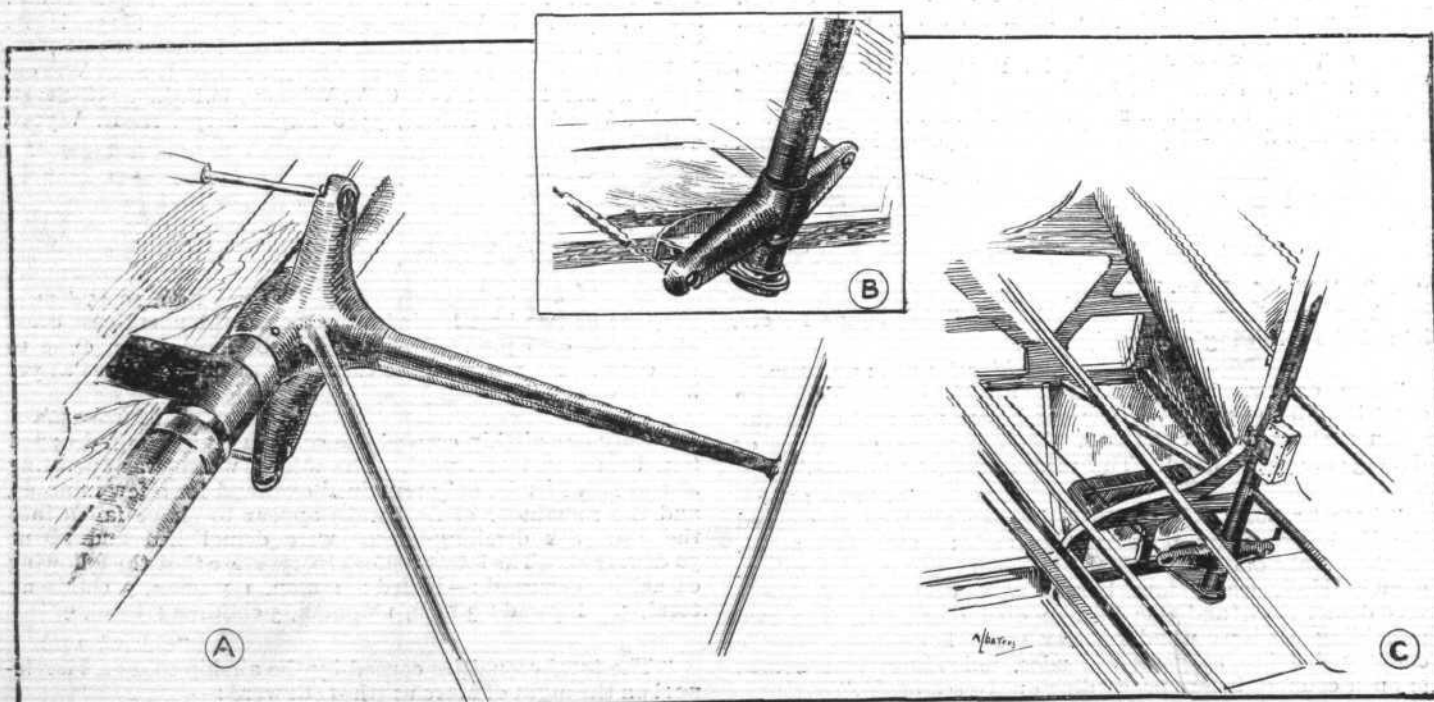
The elevator and rudder crank levers on the Albatros biplane. A shows the elevator crank lever with its ball and socket joint for the turnbuckle. In C is shown the mounting of the rudder, and in B the bottom rudder bracket and crank lever.
